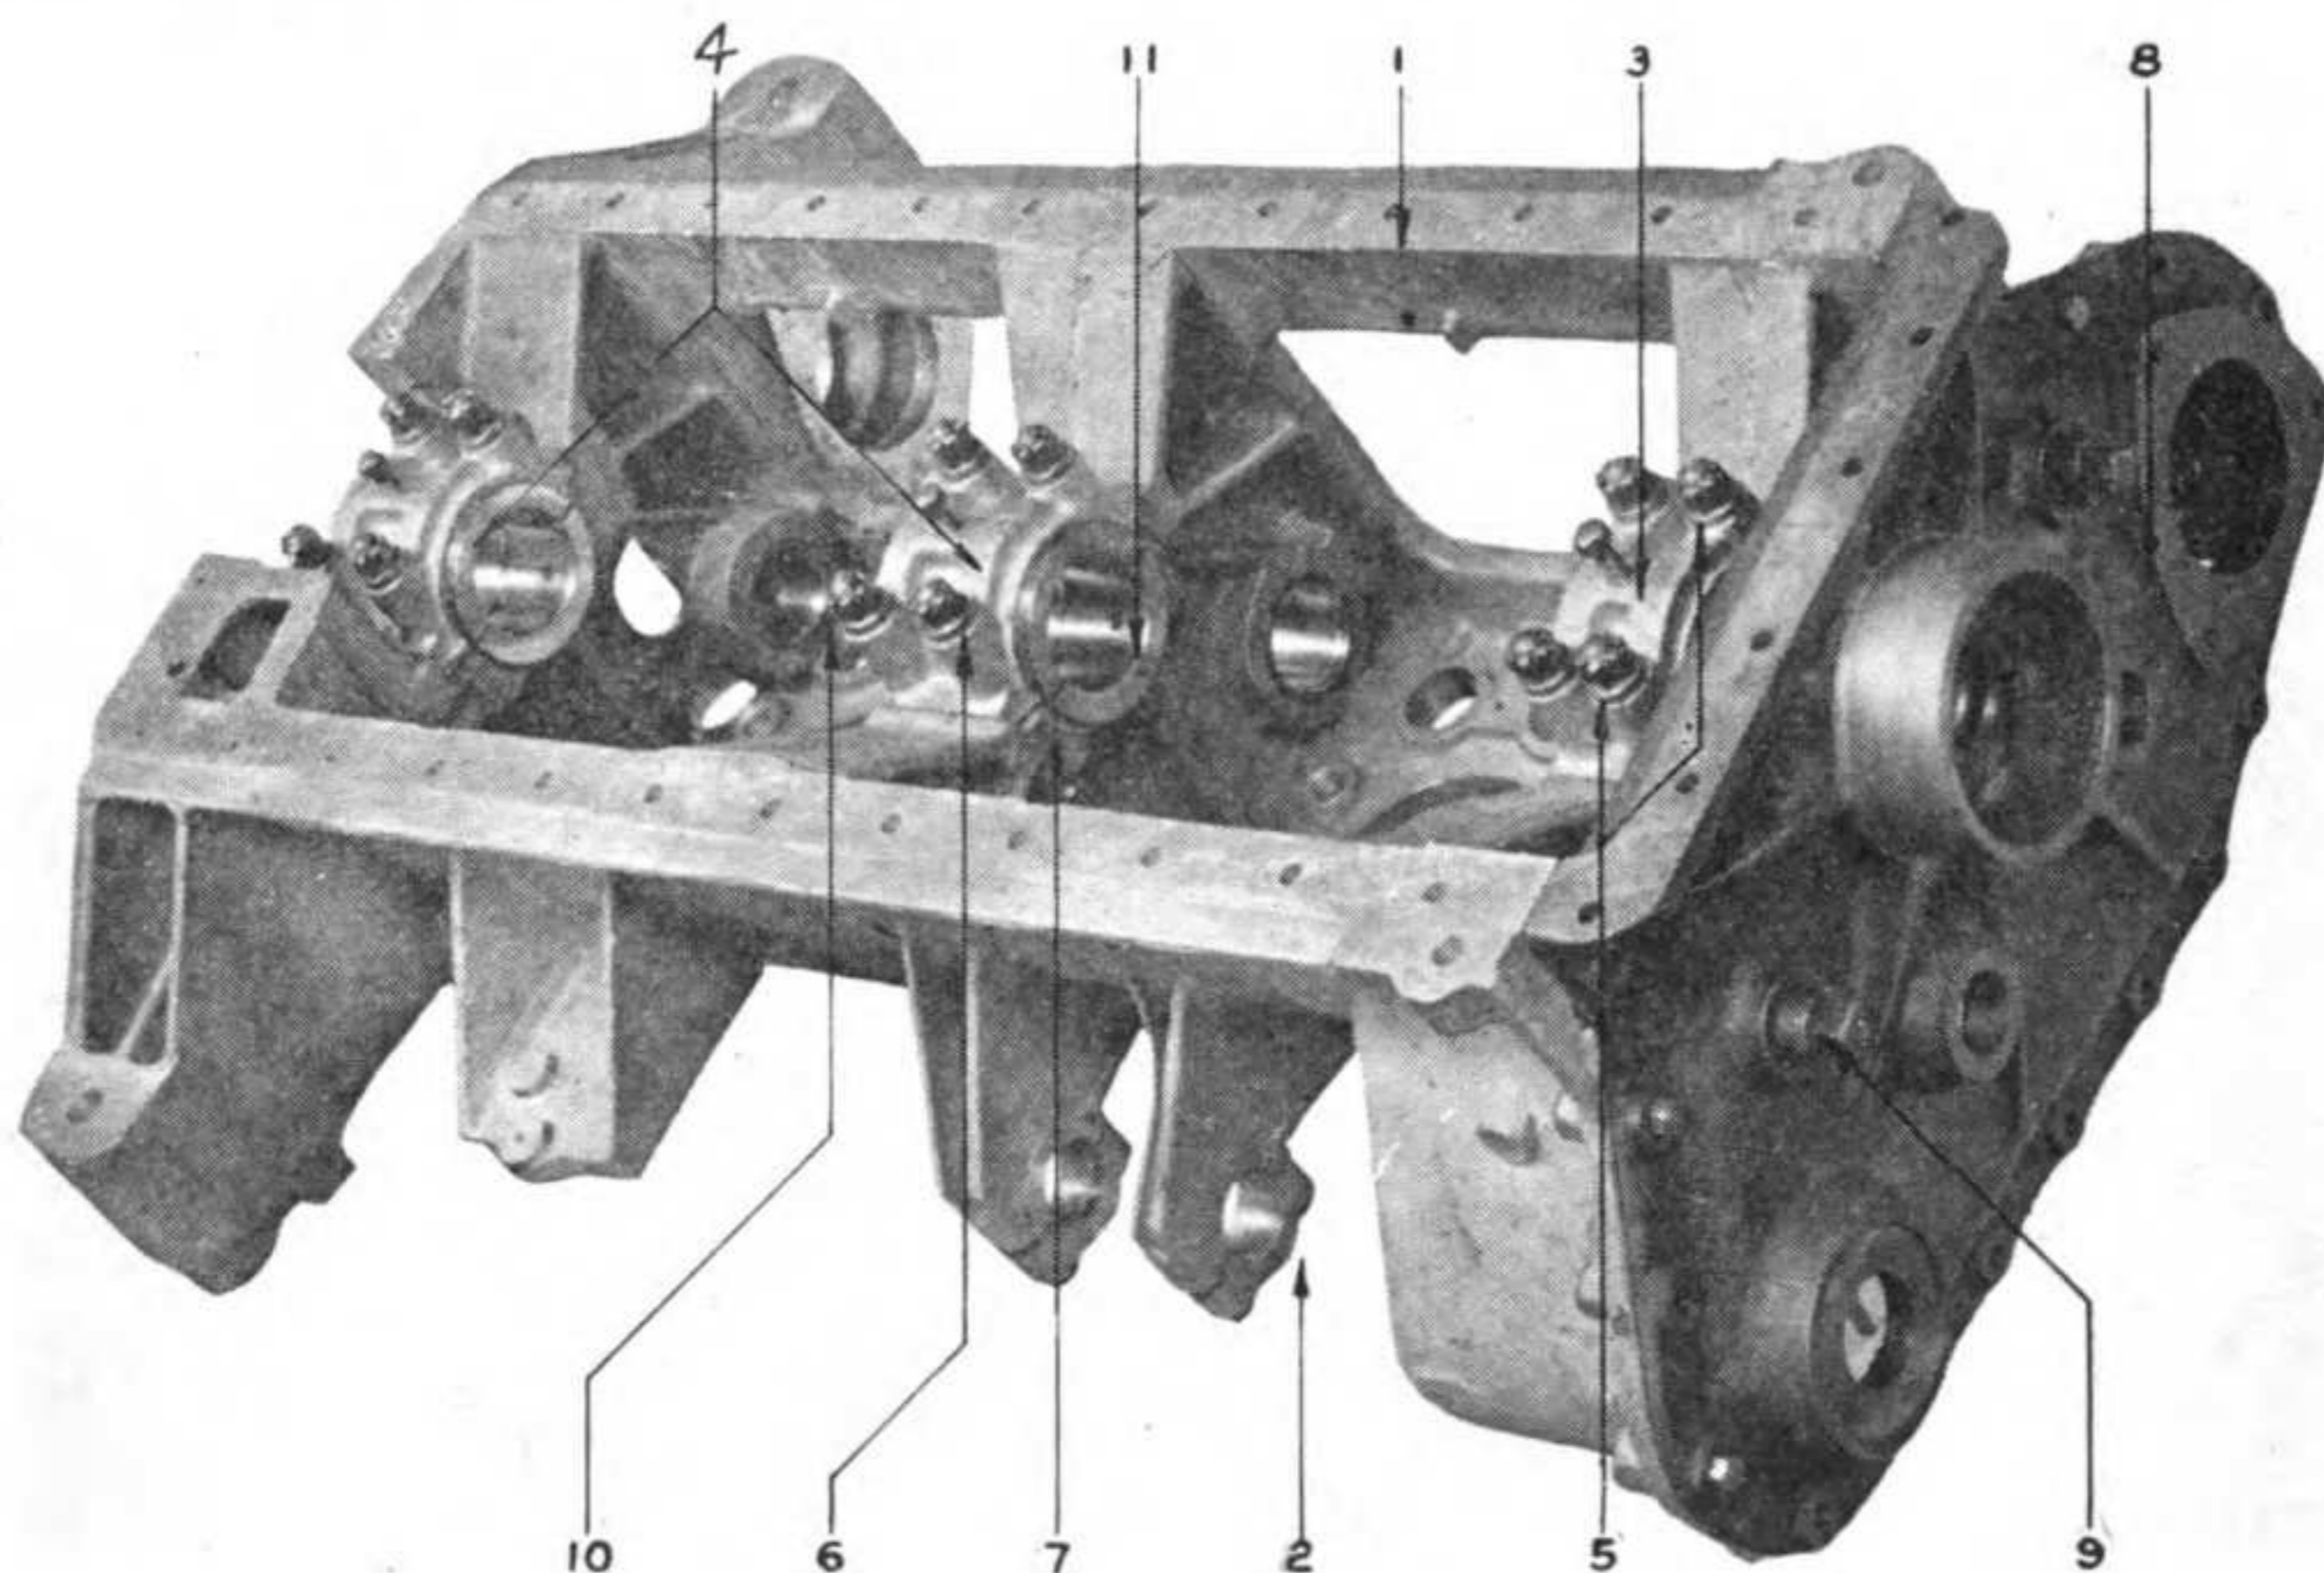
CRANK CASE ASSEMBLY, UPPER
